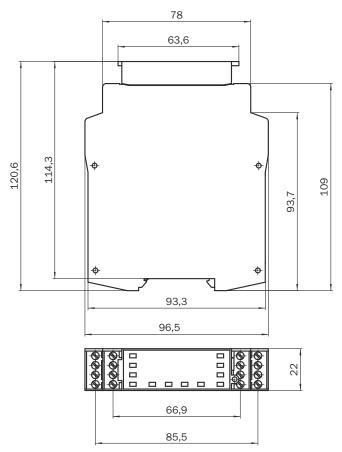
Dimensional drawing UE410-SD300 Dimensions in mm
